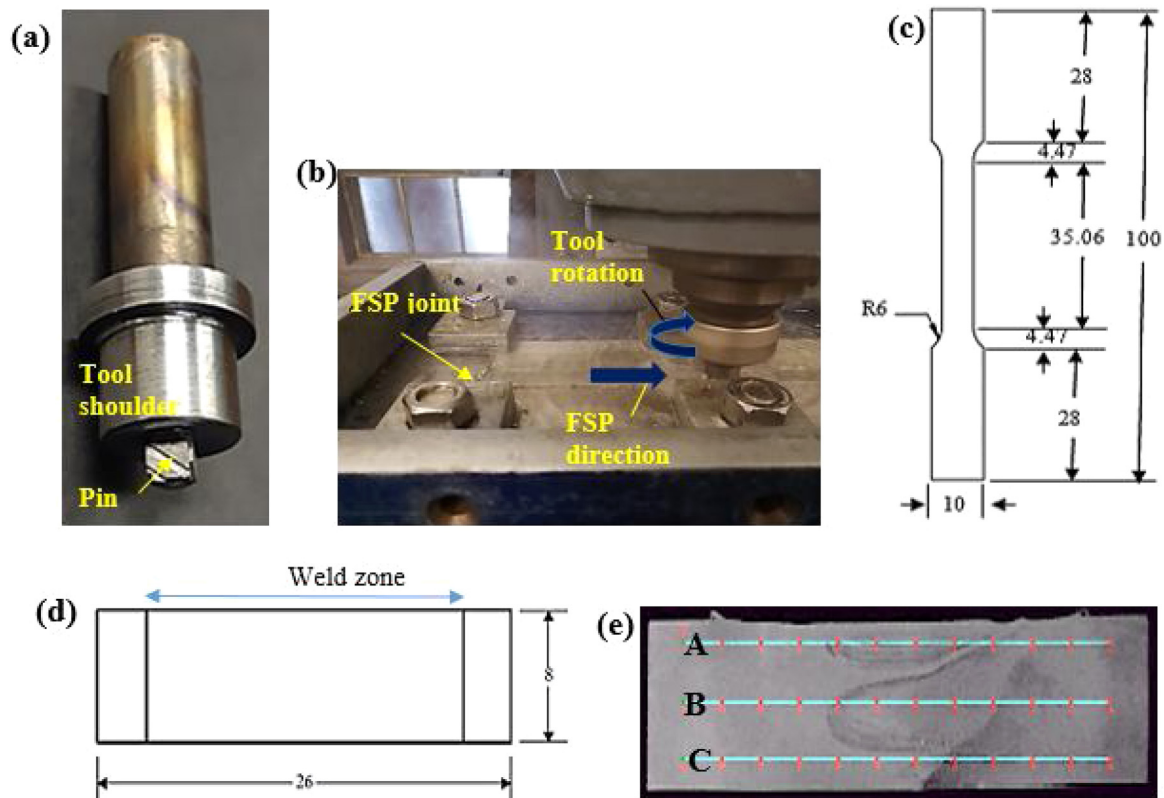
(a) FSP tool, (b) SFSP view, (c) tensile test specimen, (d) microhardness specimen and (e) 3-line pattern.
